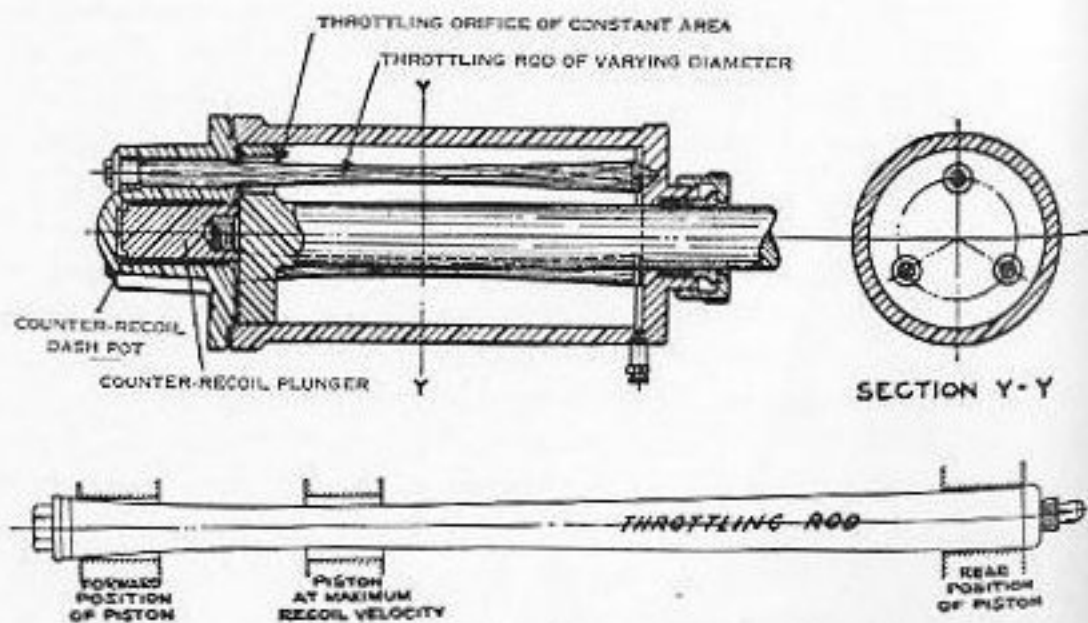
TYPICAL MAJOR CALIBER RECOIL CYLINDER.
